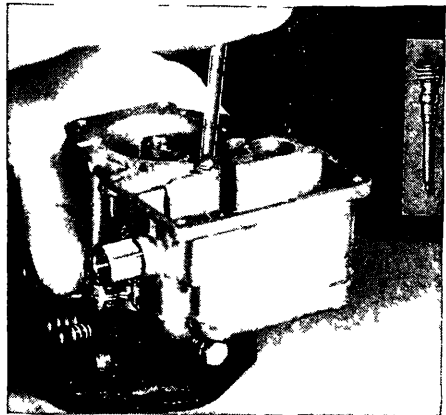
Assemble idle tube. Use screwdriver having small enough blade to avoid damaging countersink in main body. To large a screw driver will make a burr on the gasket surface
